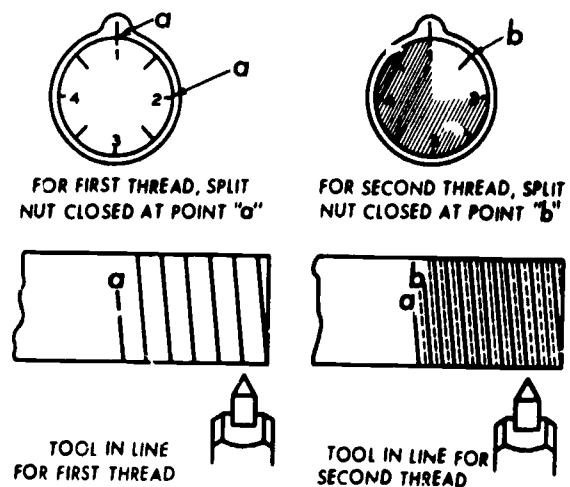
Cutting multiple threads using the thread-chasing dial.
